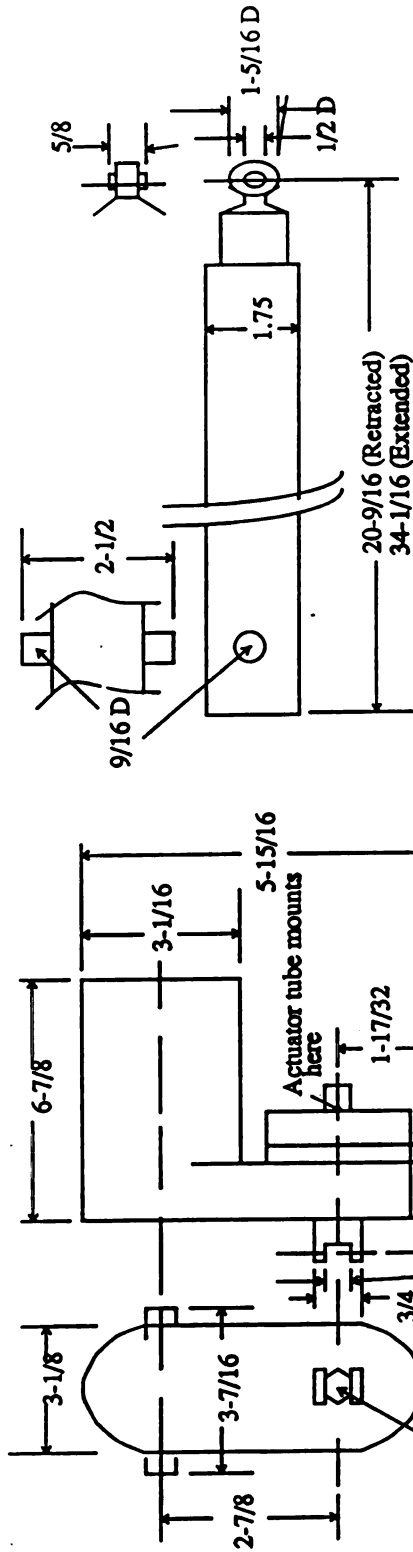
90 V DC Drive Dimensions (6.7 lbs)
